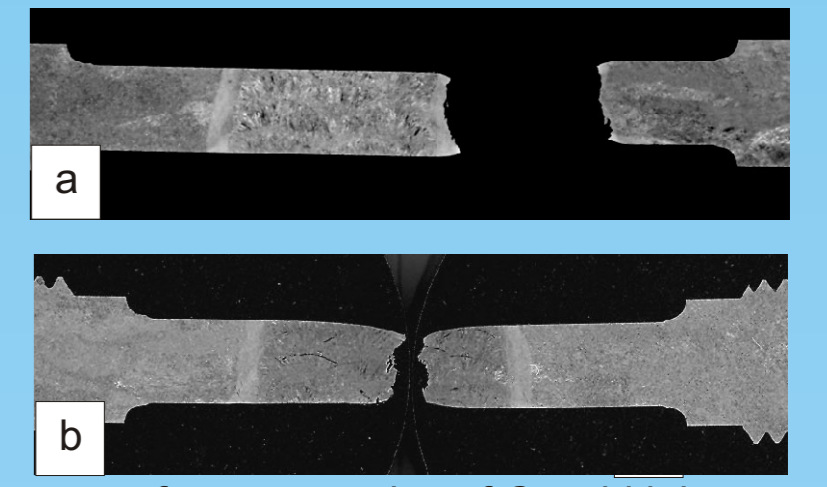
Macrostructure of crept samples of C weld joint: a) 600°C/80MPa/25,818hrs and b) 625°C/50MPa/29,926hrs
